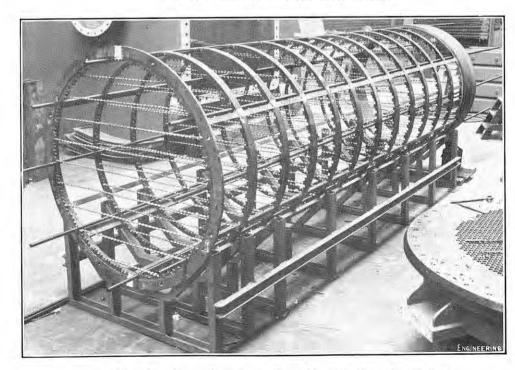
INNER FRAME FOR TUBE NEST OF HEAT EXCHANGER.
